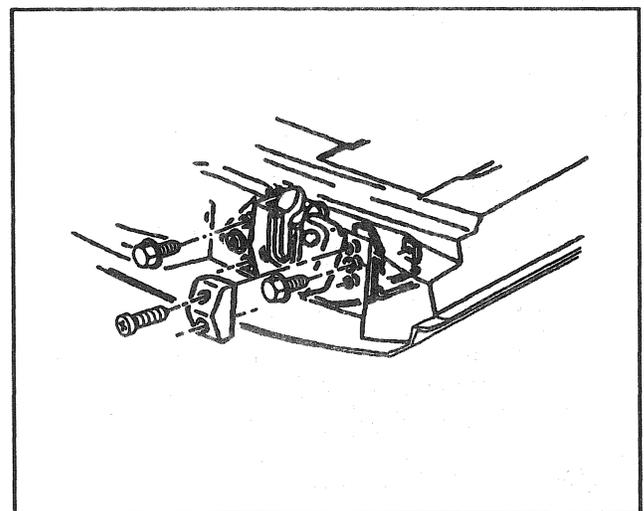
Rear Cargo Door Outside Handle and Lock Control Rods
